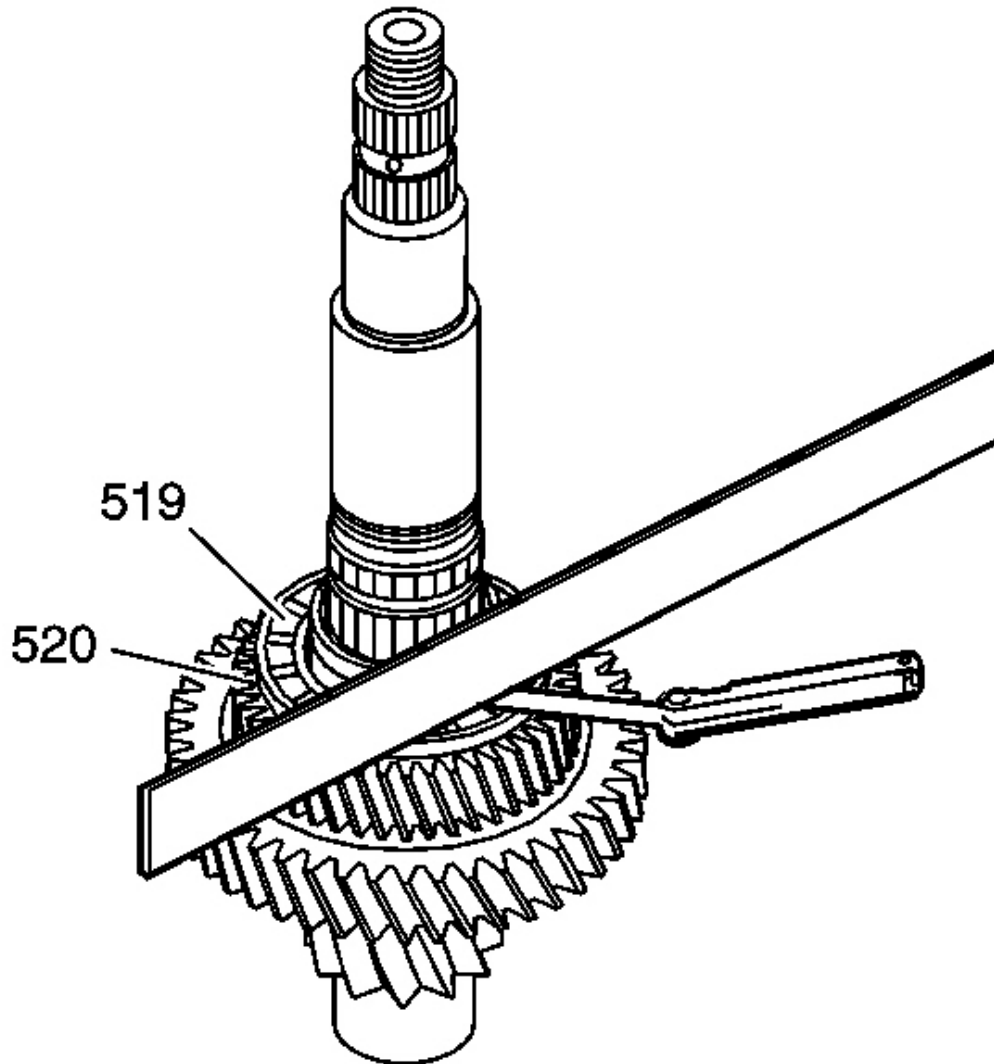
Measuring Between The Straight Edge & Roller Bearings Using A Feeler Gage
